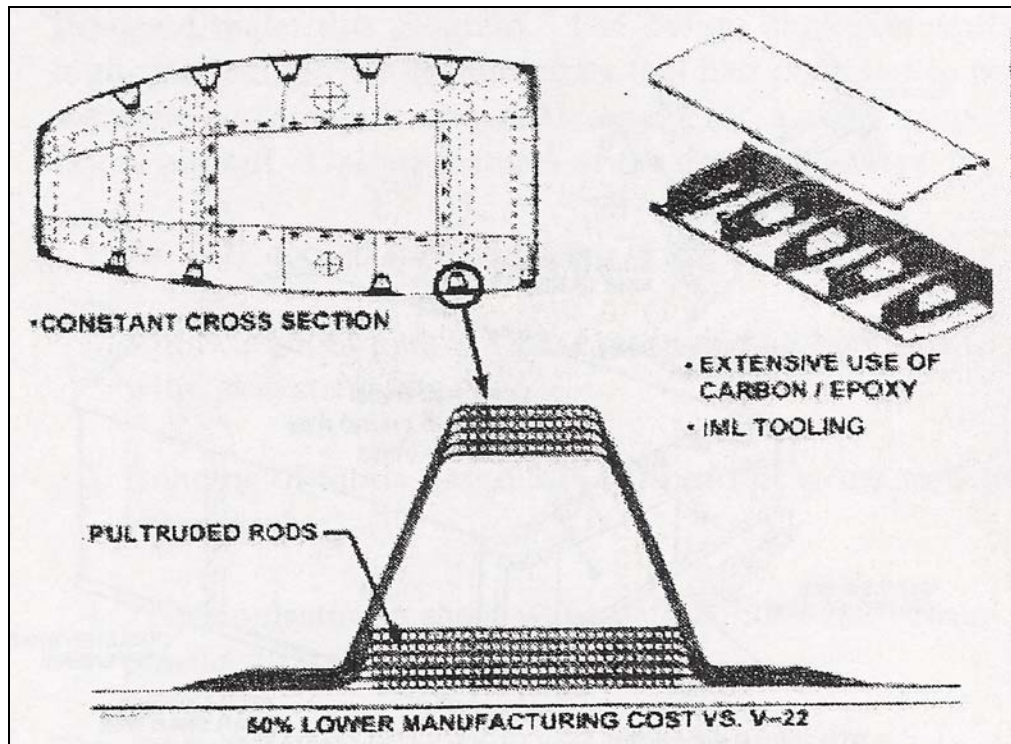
Cross-section of proposed wing with detail of pultruded rod stringer [21]
